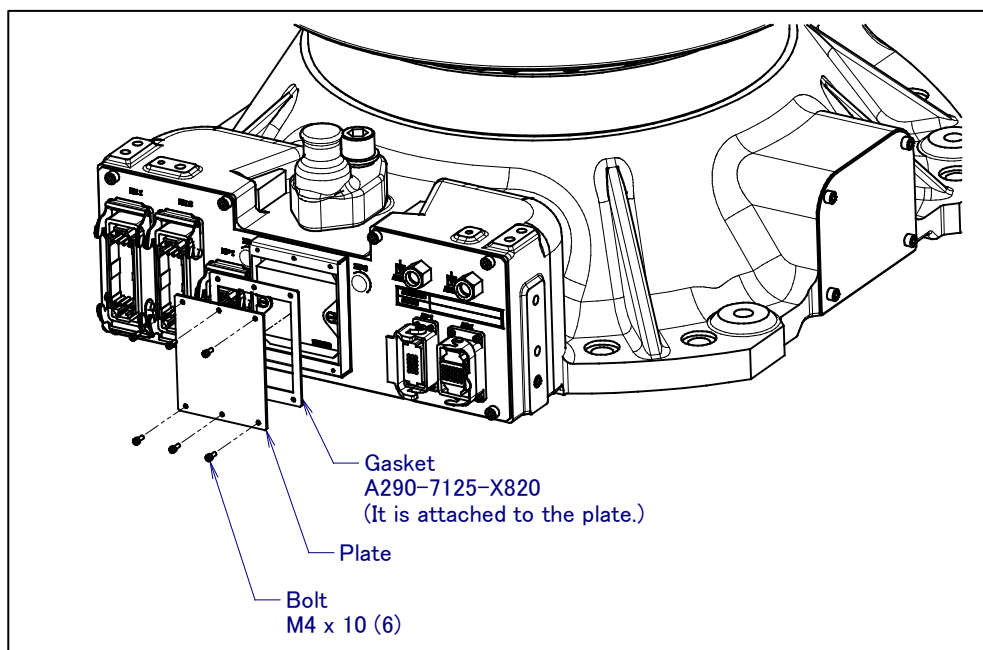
(b) Removing the battery cover plate (When severe dust/liquid protection is specified)
